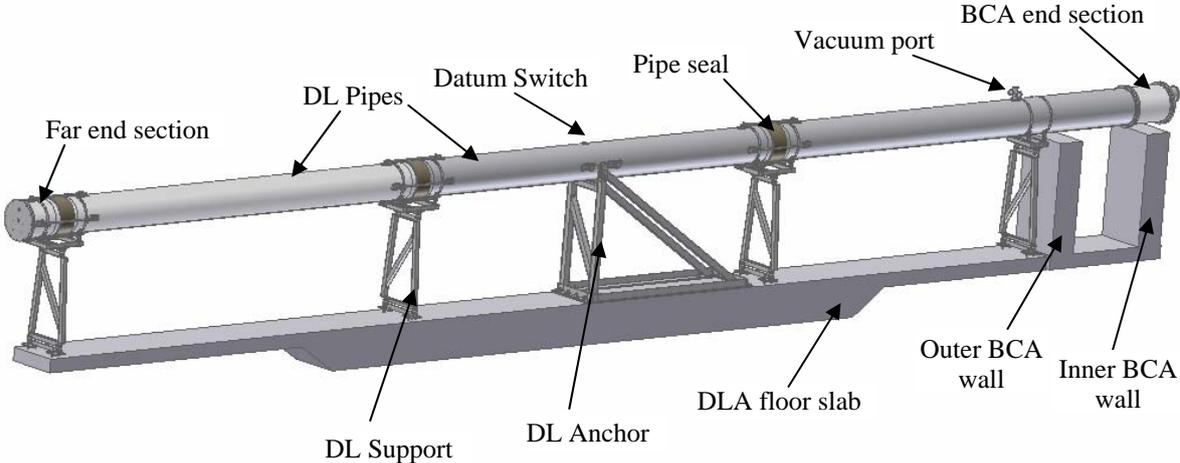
A 3-D view of the delay line nearest to the BCA. The wall between the DLA and the outer BCA and the wall of the inner BCA are shown. The anchor and the supports either side are positioned over the thickened floor slab. The end of the pipe at the left shows the end section that would be at the far end of the delay line. The locations of the datum switch and the vacuum port are also shown
